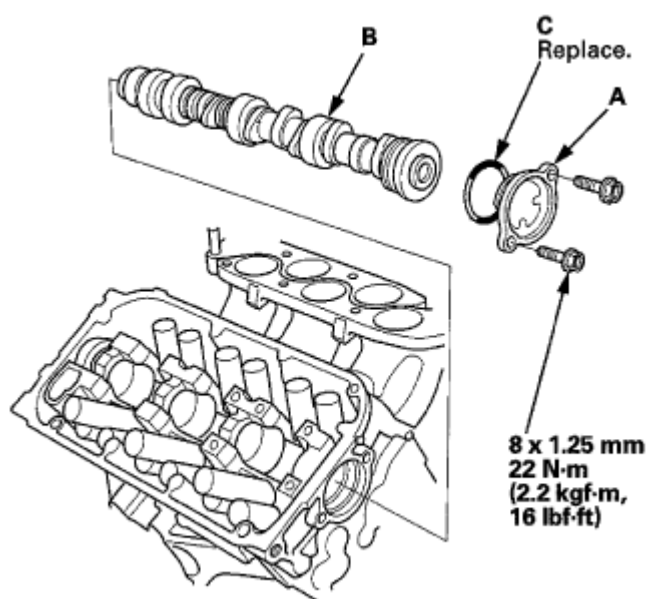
Identifying Thrust Cover, Front Camshaft, O-Ring And Mounting Bolts Torque Specification
